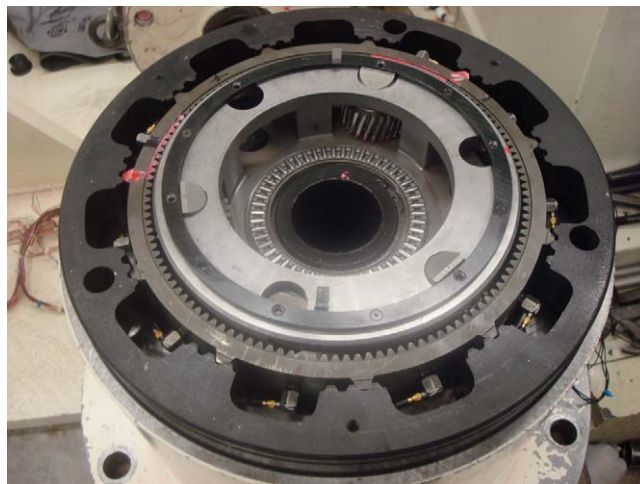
A view of the accelerometers mounted radially on the outside surface of the test ring gear.
